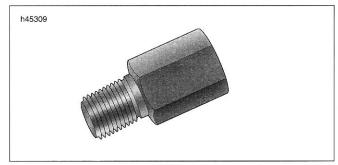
Oil Pressure Gauge Adapter (HD-45309)
